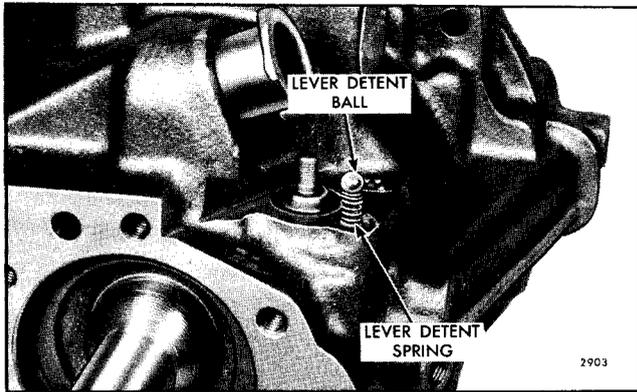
Location of Selector Valve Lever Detent Spring and Ball in Gear Housing
